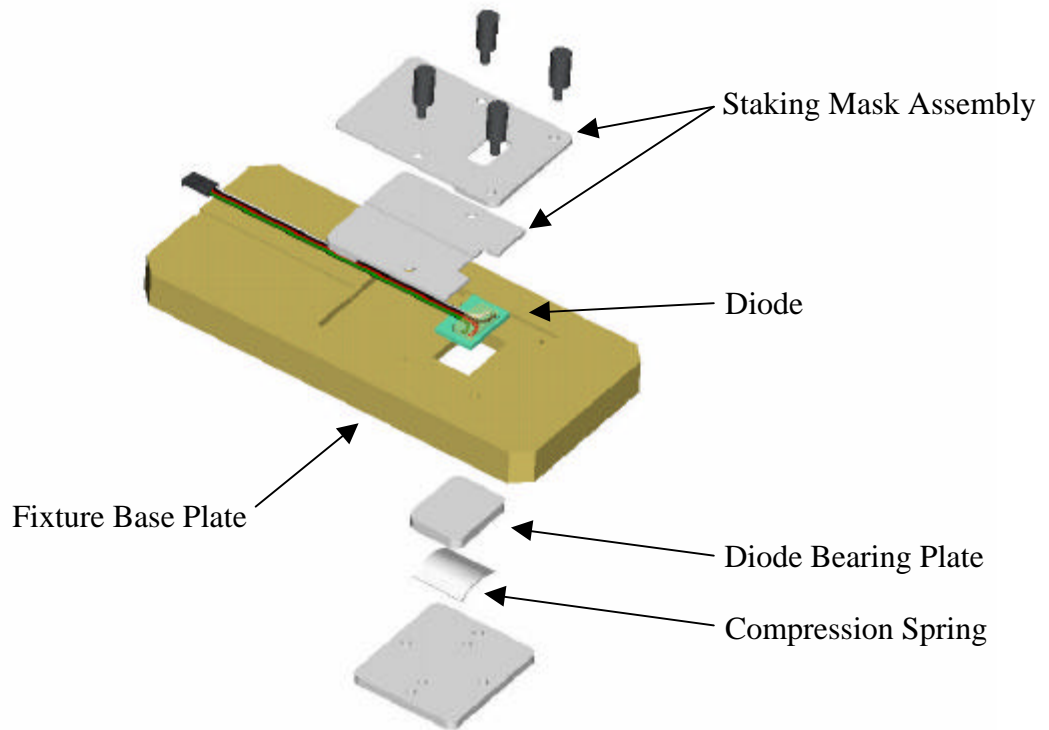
Exploded View of Tooling Configured to Stake PIN Diode Leads
